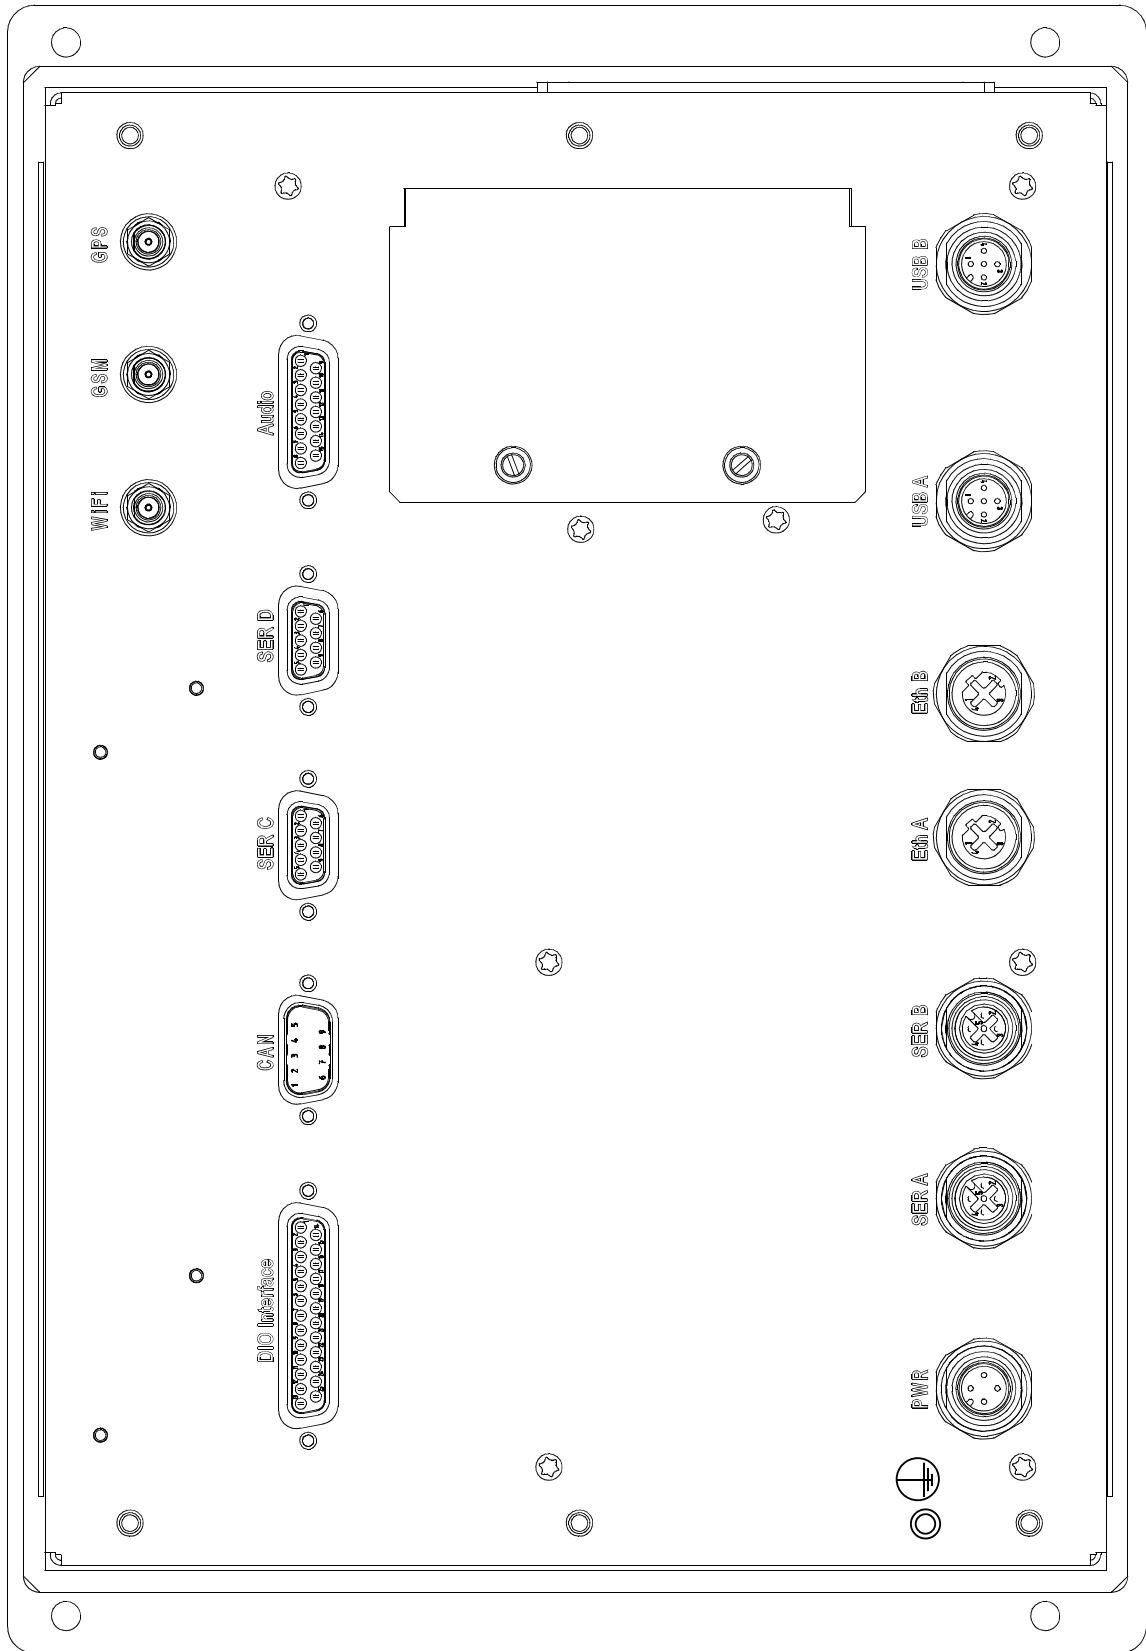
Assembly Drawing of the HMITR-104 Both Versions (Top)
